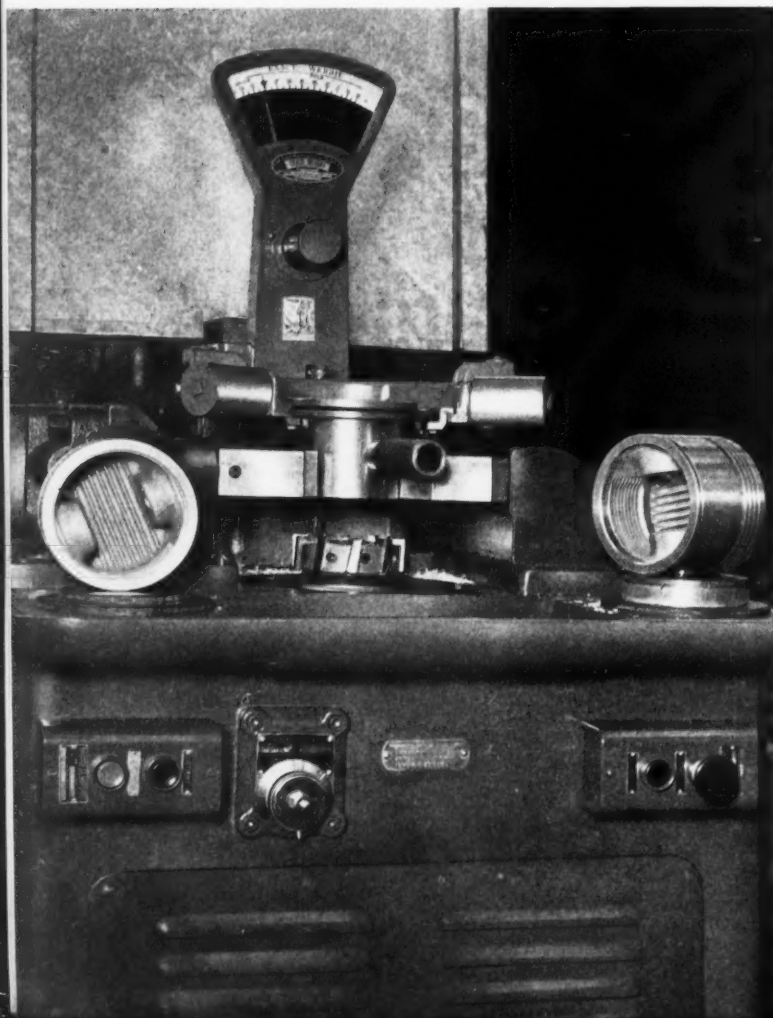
Machine that Automatically Checks the Weight of Pistons and Makes Correction for Over-weight
